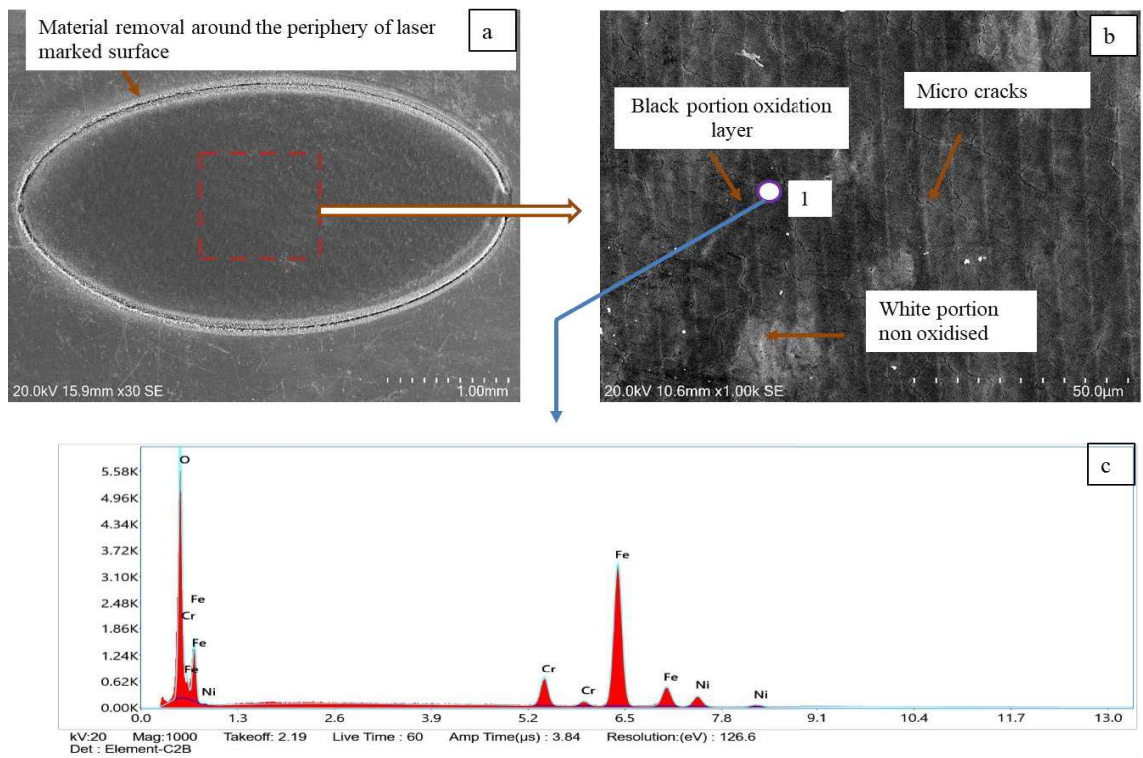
SEM images of marked surface with the EDX analysis of inner marked surfaces at focussed condition (a) Full laser marked surface, (b) Enlarged view of inner laser marked surface, (c) EDX analysis of spot of inner laser marked surface
